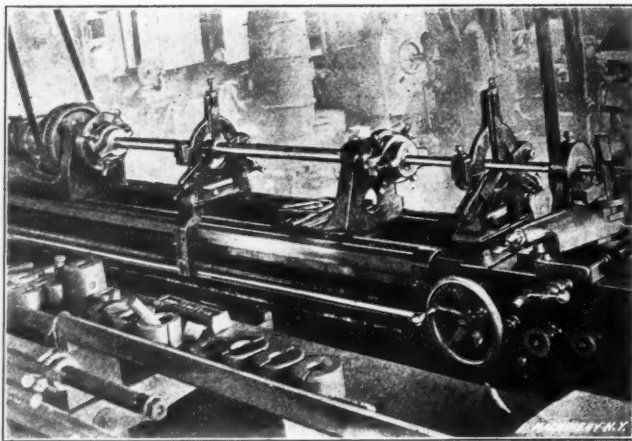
One End of the Lead-screw Lathe—Note Extension Driving Head
